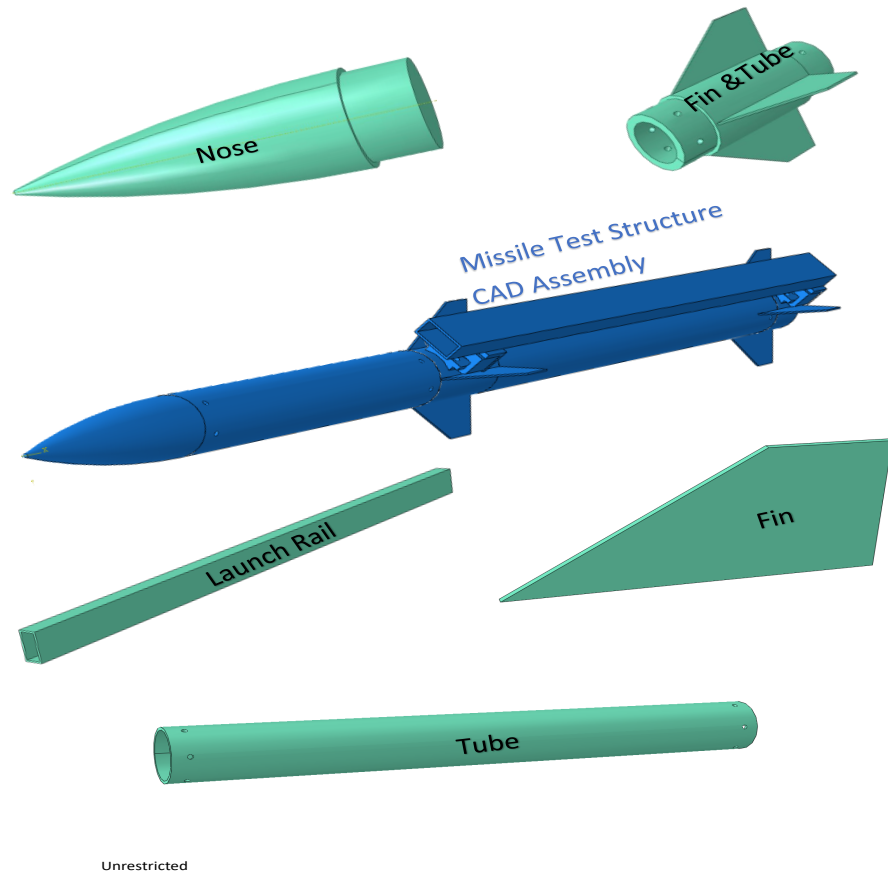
Individual CAD parts and assembly of the Missile Test Structure.
